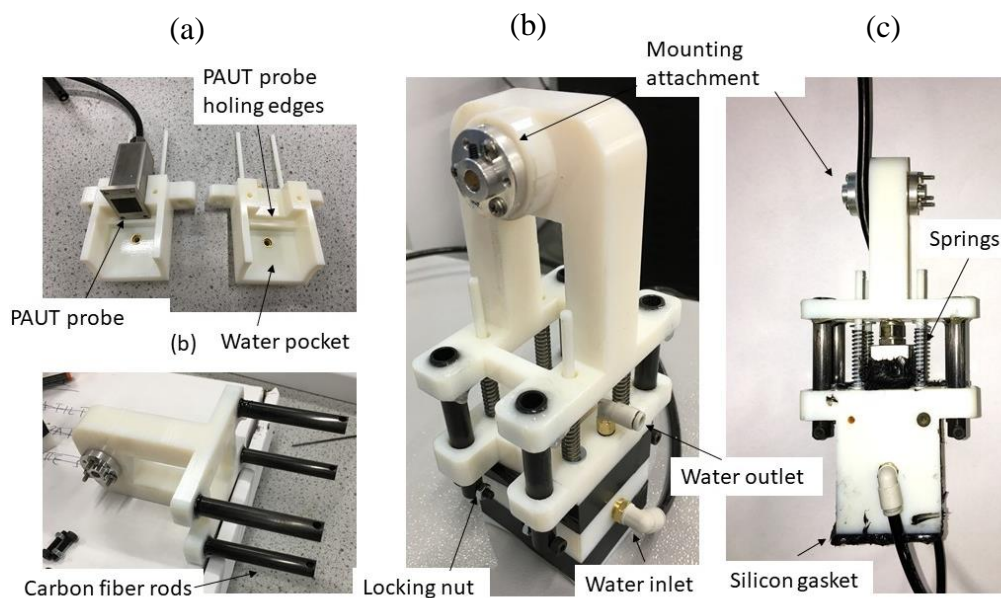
Prototype of the continuous water supply wedge; (a) water pocket and PAUT probe; (b) manipulator attachment; (c) and (d) prototyped wedge
